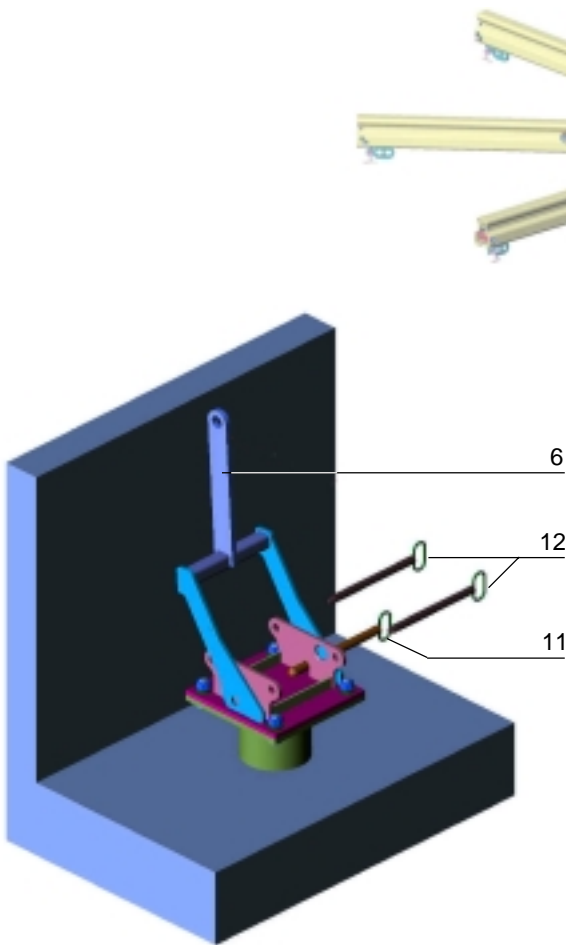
Fitting mast and the removable lifting bracket (6)
